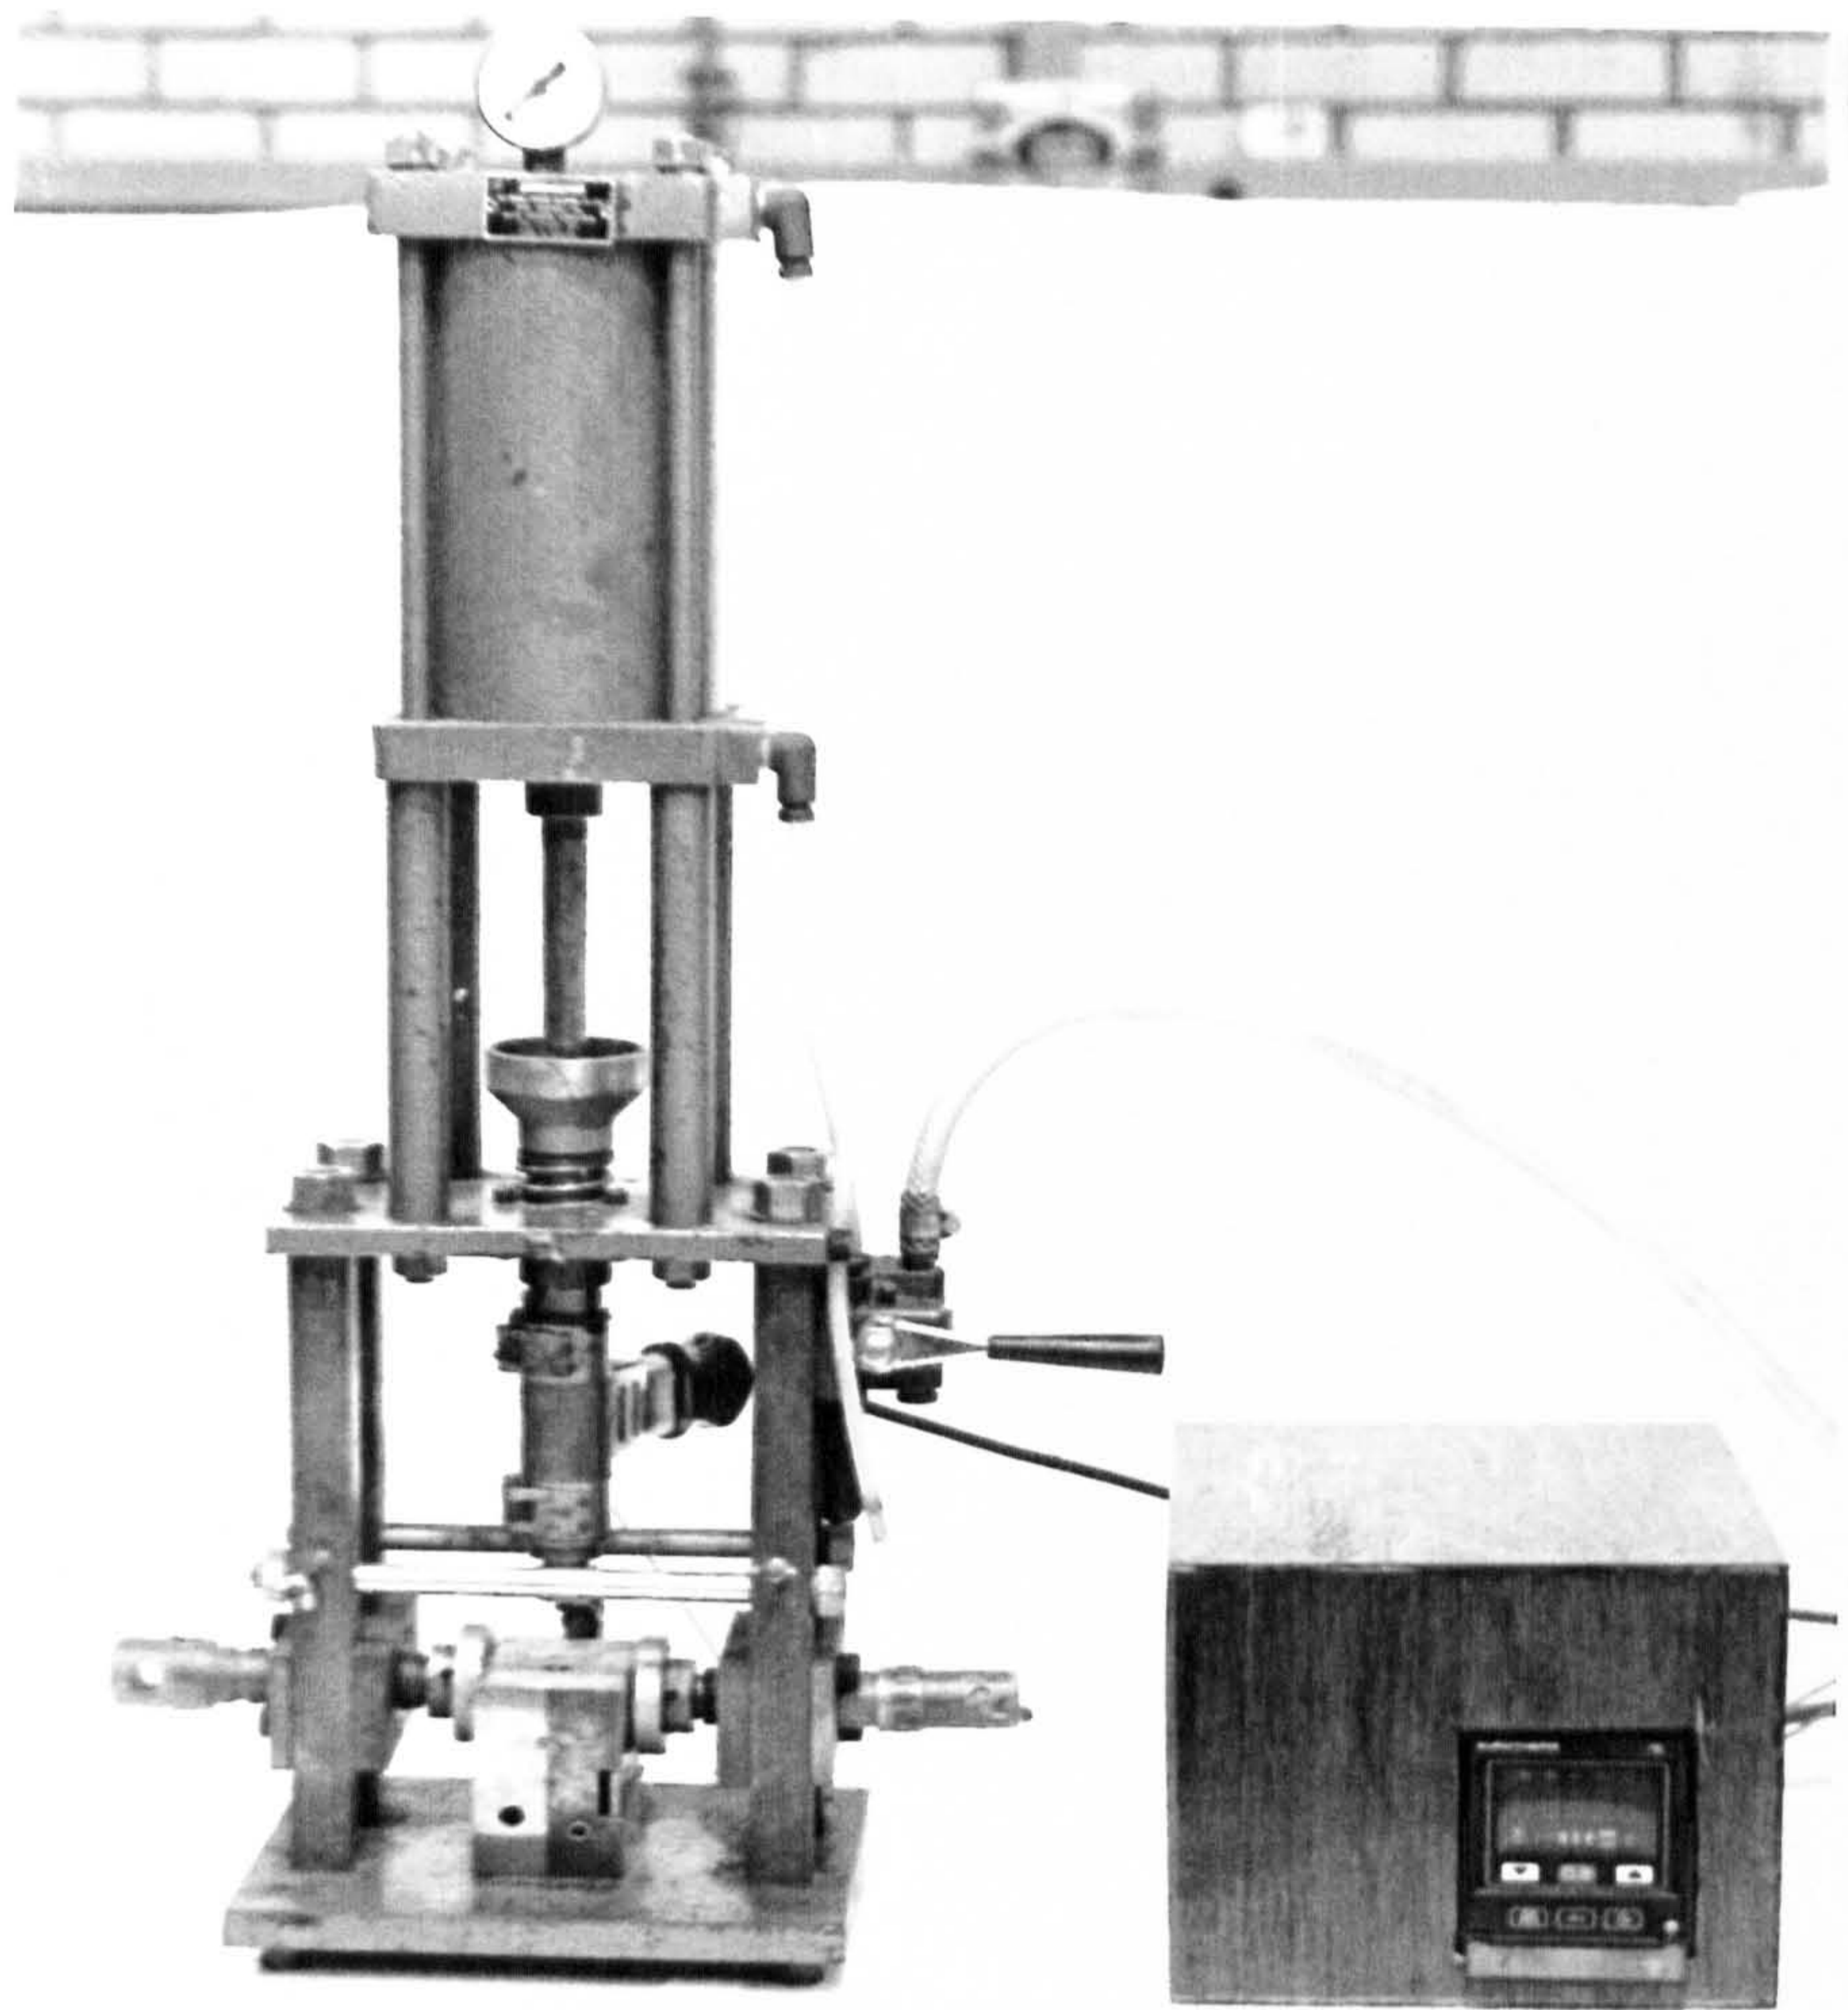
Picture of the small plunger type compressed air (PTCA) injection moulding machine.
